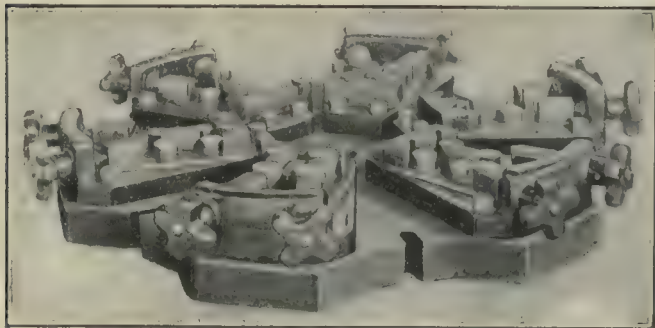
FIXTURE FOR MILLING STRAIGHT LINK
